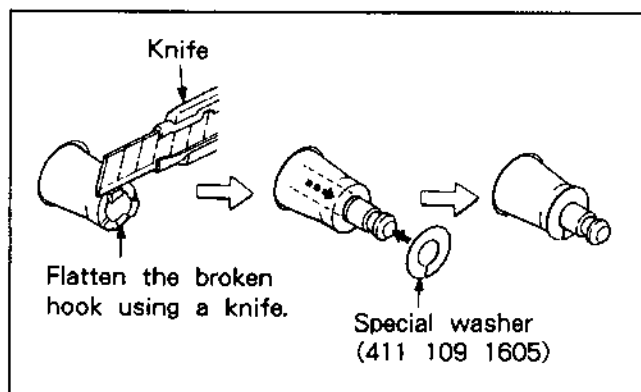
Method of Repairing the Bearing Section of the REV GUIDE LEVER ASSEMBLY
